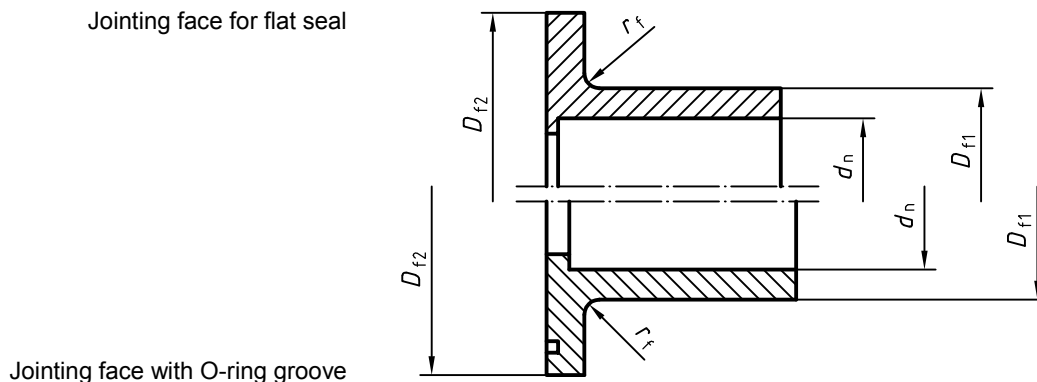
Dimensions of flange adaptors for solvent cementing
